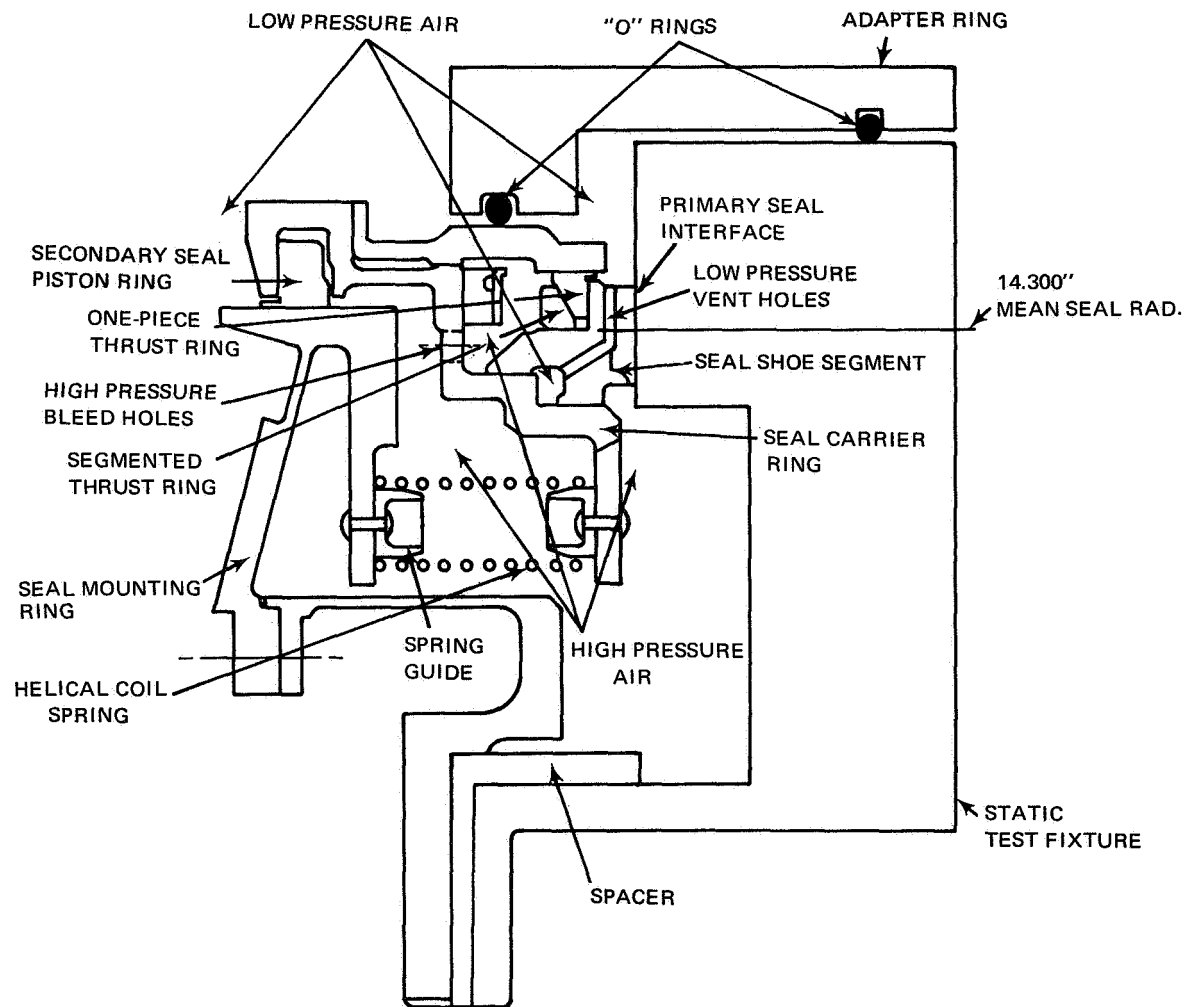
Cross Section of Fixture for Static Test of the One-Side Floated-Shoe Interstage Seal
